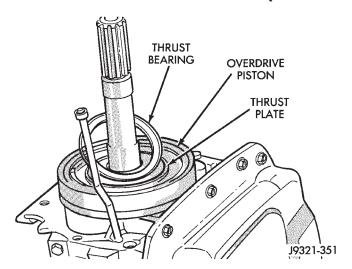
Overdrive Piston Thrust Bearing Removal/ Installation
